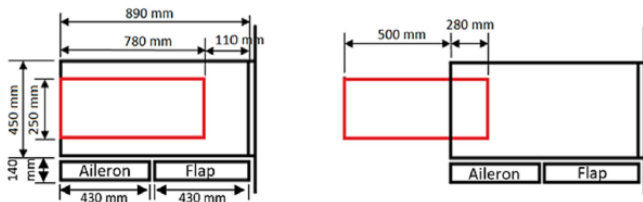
Technical drawings of the wingspan changeable wing [19]
